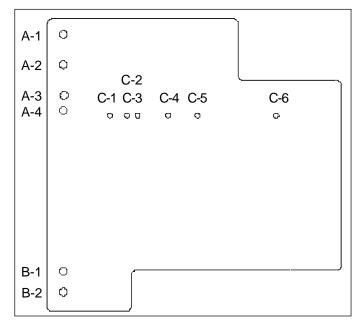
Front View of CloSure[™] Tool Showing Mounting/Testing Hole Locations (6352C49H01)
